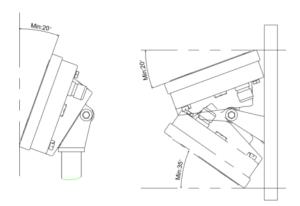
IND236 Mounted to Column (left) and Wall (right)
